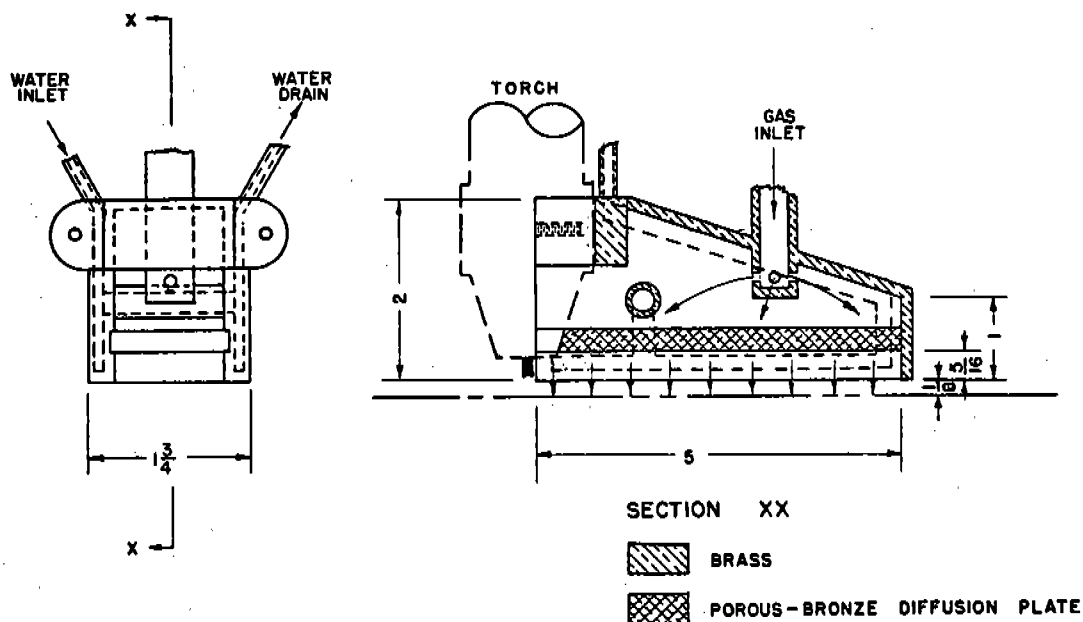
TRAILING SHIELD for protecting the hot weld metal while solidifying and cooling.
